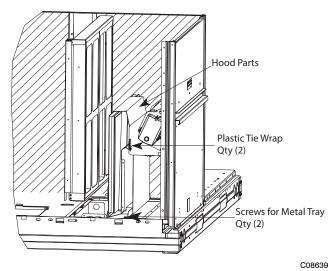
Economizer and Two-Position Damper Hood Parts Location
